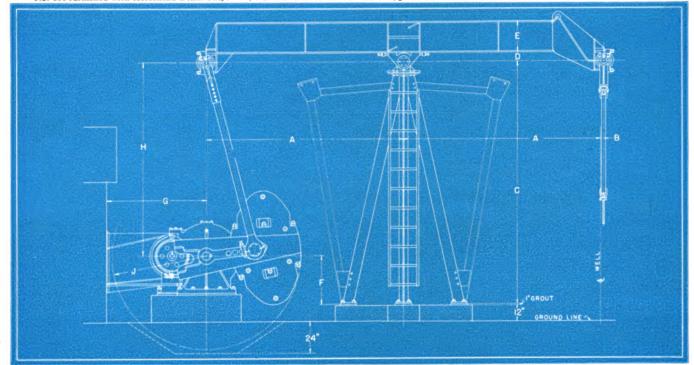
Lufkin Single Crank Unit Assembly—Crank in Sump GENERAL DIMENSIONS
